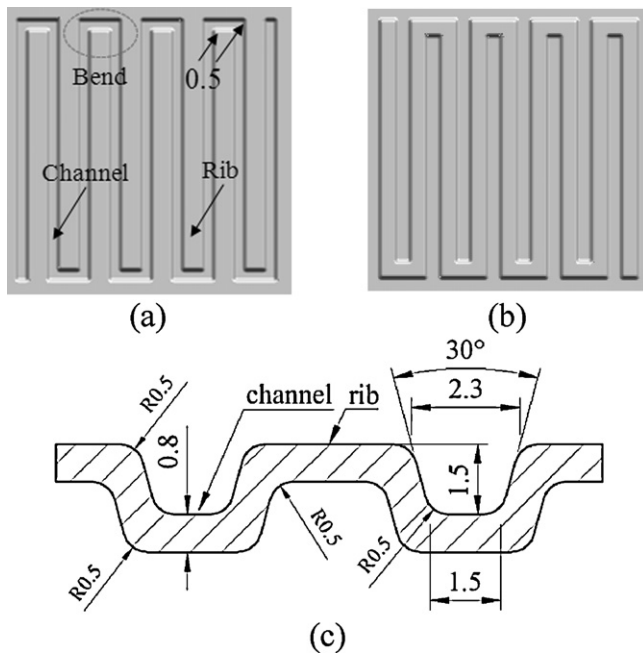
Geometries of micro-channel: (a) top view, (b) bottom view and (c) section view (unit: mm).
